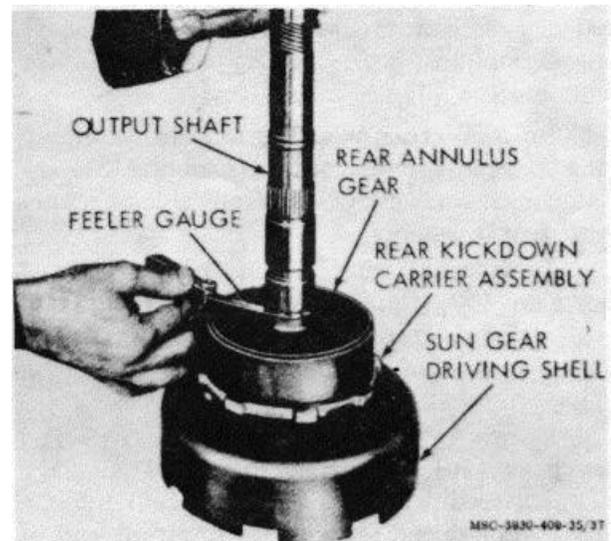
Measuring end play of planetary and sun gears, and driving shell b. Inspection.
